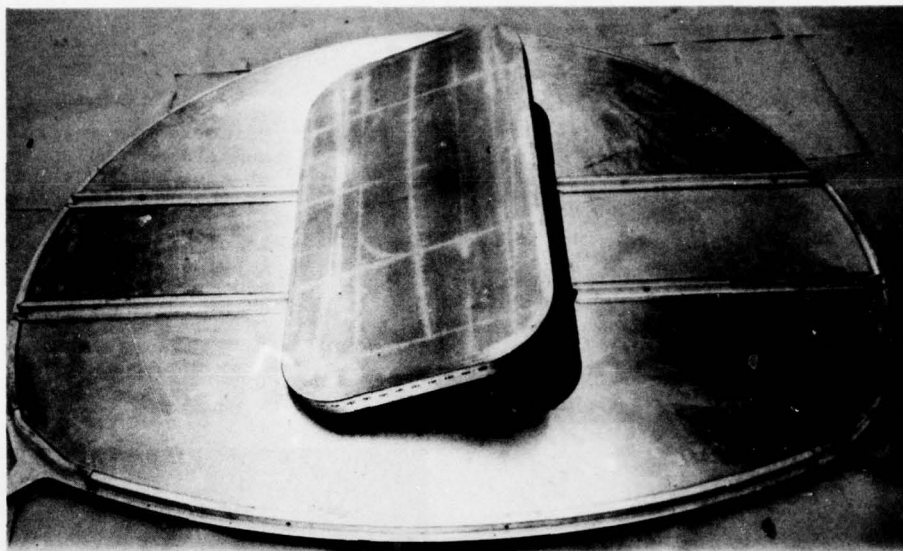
Fuselage bulkhead entirely built as honeycomb core sandwich construction. Load introduction takes place primarily via bonded edge profiles.
